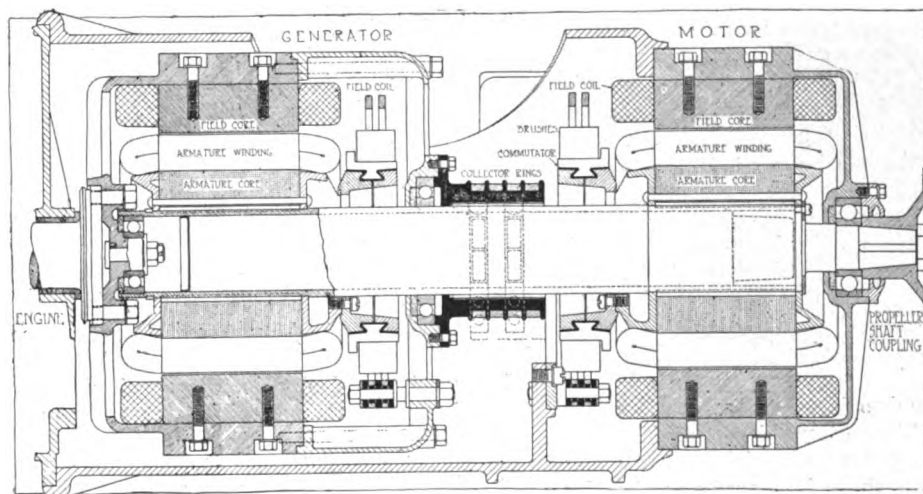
Magnetic transmission of Owen car which takes the place of clutch, gearset, starting motor and lighting generator
